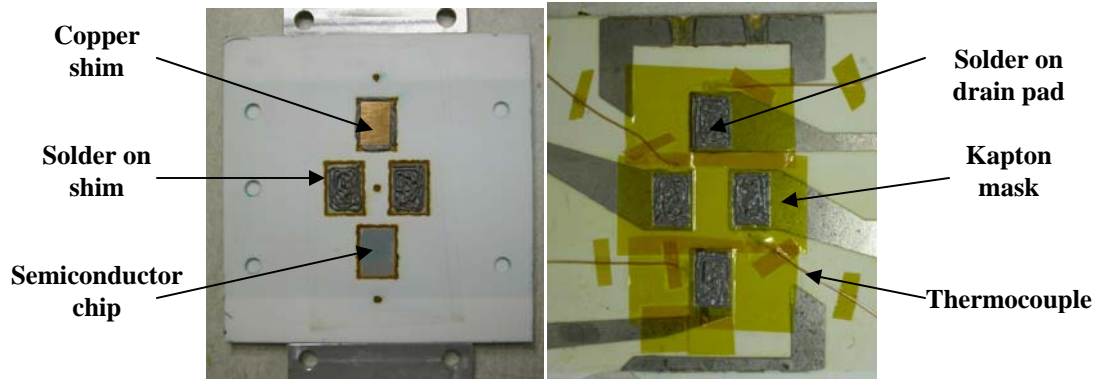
Bottom side of chips showing MOSFET drain, solder paste, and copper shim; Solder paste on DBC drain pads
